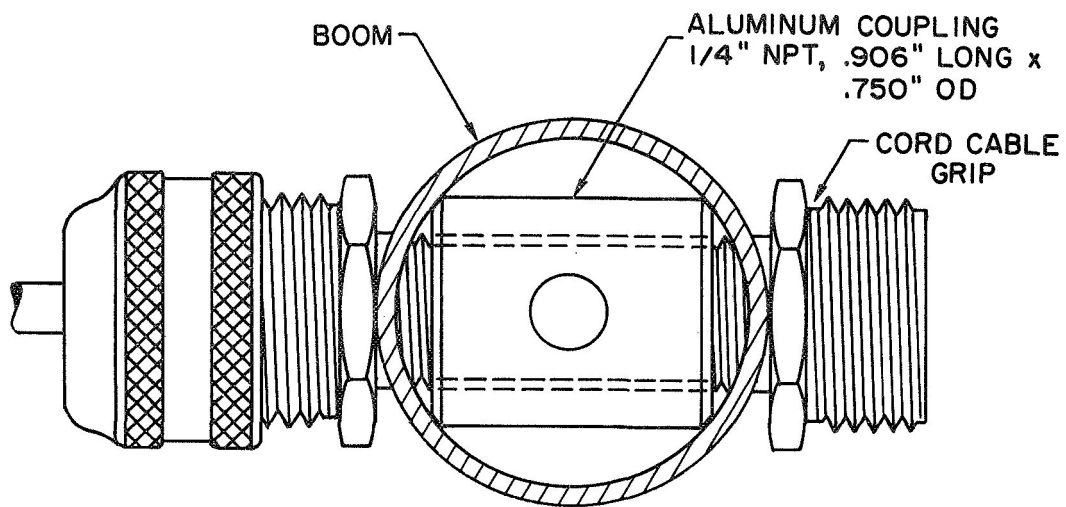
PARASITIC-ELEMENT FITTING ASSEMBLY.
